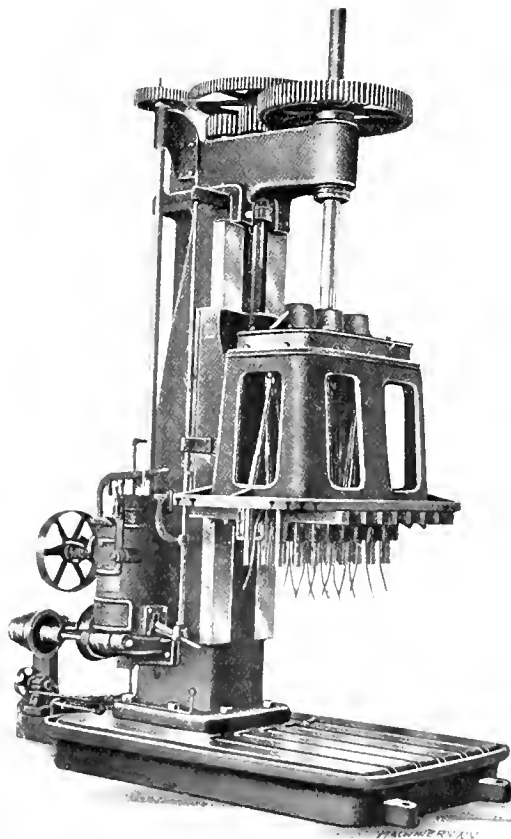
Sixteen spindle Baush Vertical Drilling Machine.
